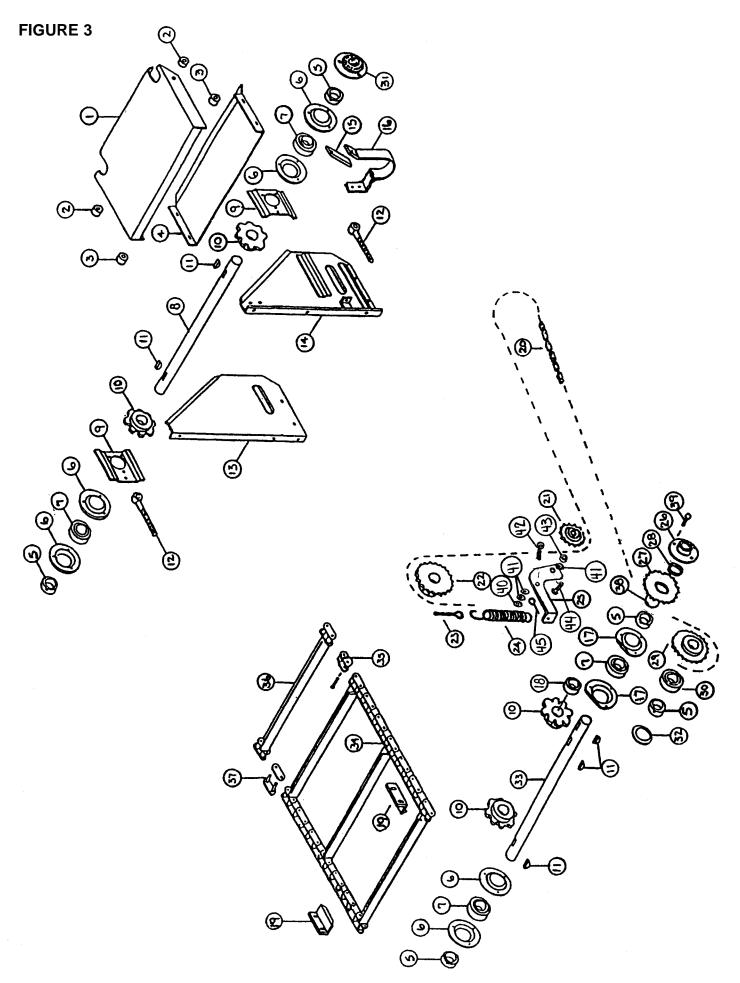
CROSS APRON AND DRIVE ASSEMBLY
